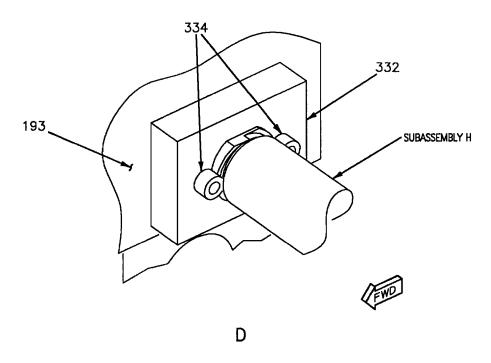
Drag Brace Sleeve Reaming (Sheet 4)
